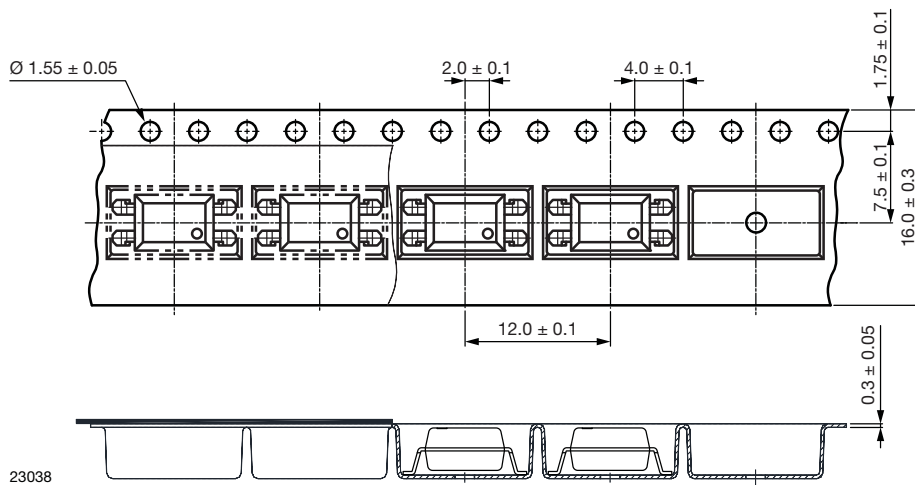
Tape and Reel Packaging (1000 pieces on reel)
